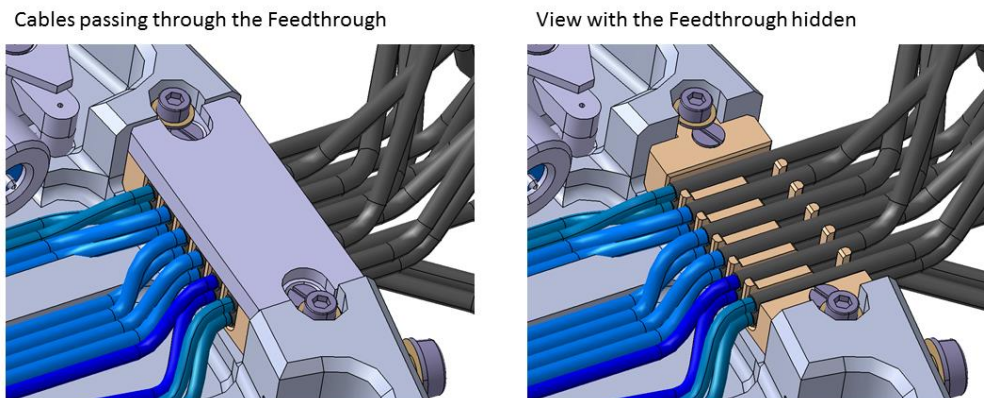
Feedthrough (in blue: Cables without shielding, in grey: cables with shielding)
